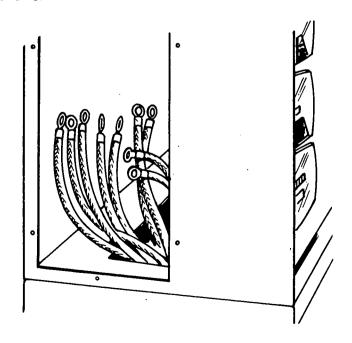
CONTROL BOX (SIDE PANEL REMOVED)
